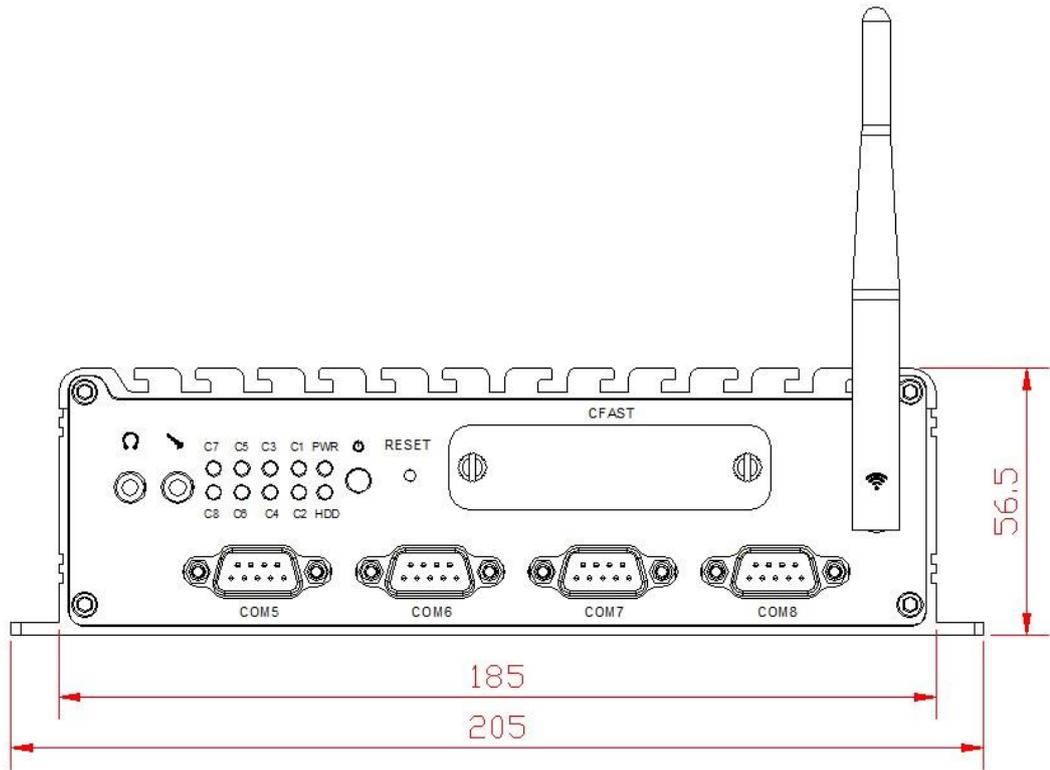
IFC-BOX2800 mechanical dimension drawing
